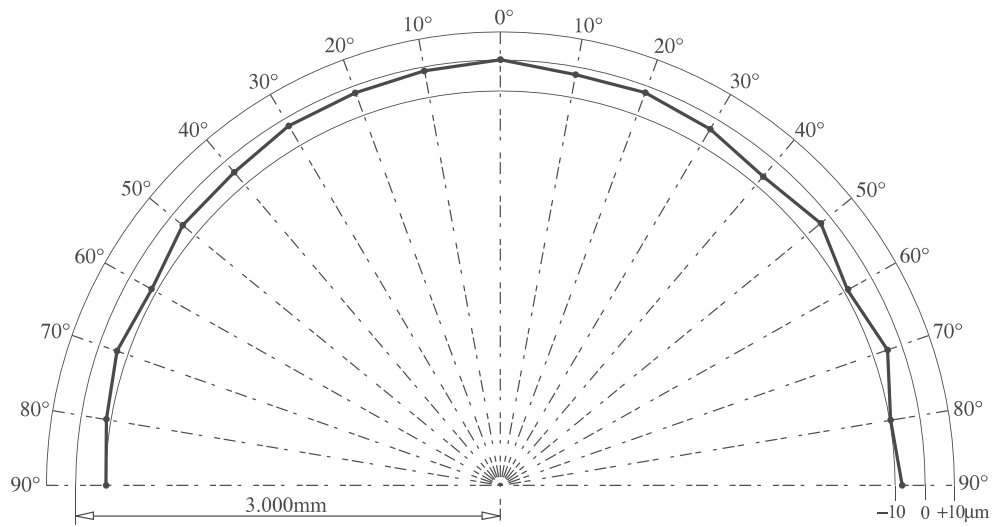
Radius accuracy measurement of fabricated ball end mill
